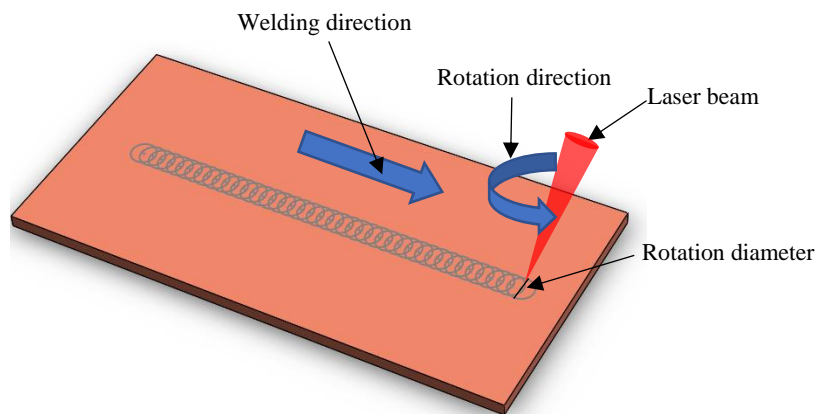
Wobbling laser beam welding scheme.
